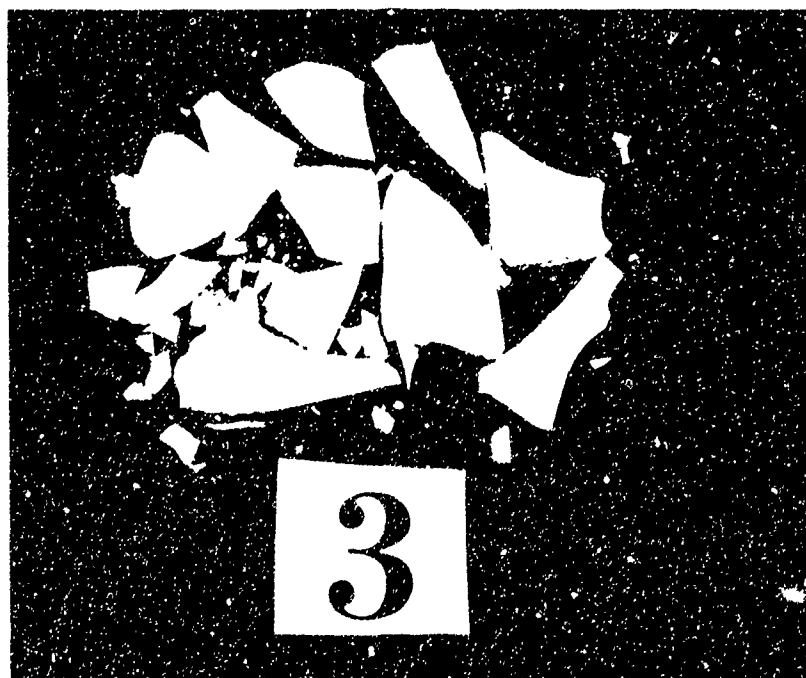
Fractured tube, path 3, Lot 6A, test T1857.
